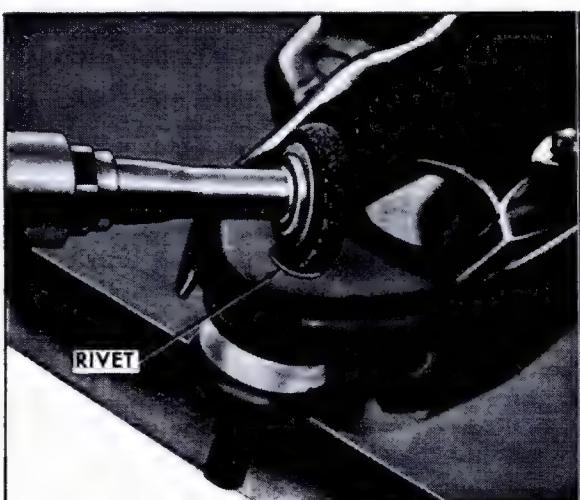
Removing Lower Spherical Joint Center Rivet
